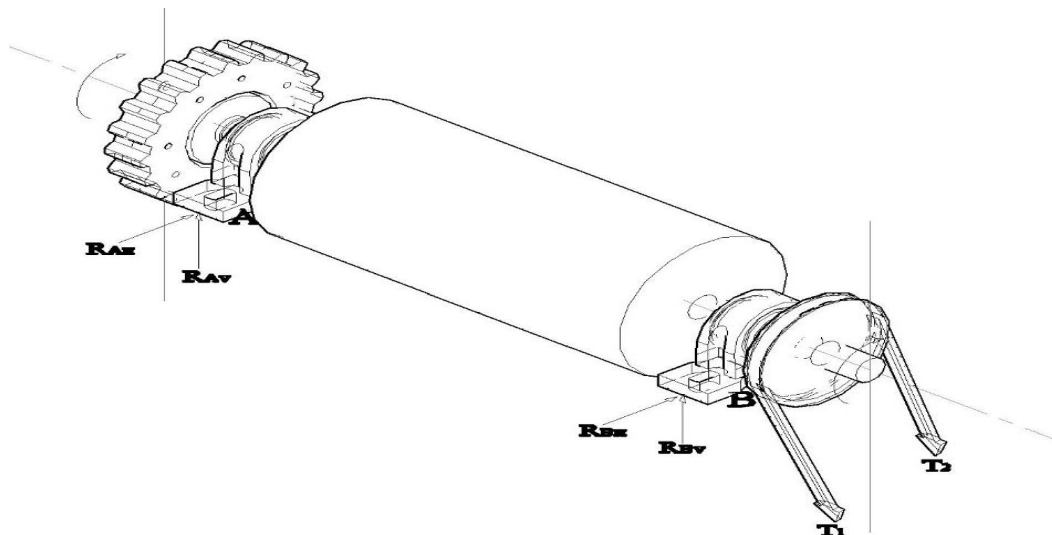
Roller-1 main shaft carrying the periwinkle cracking roller with a pulley, two bearings (A and B) and a gear.
